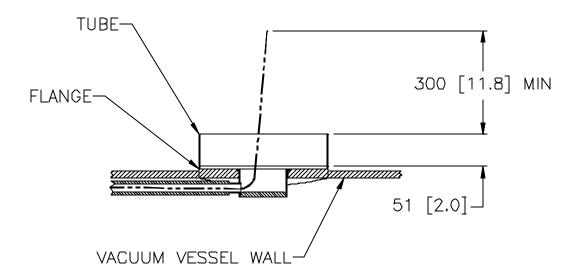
IFS flange on the vacuum vessel. Dimensions are in mm [inches]. A tube of 206 mm OD and 2 mm wall thickness extends 51 mm above the tube-flange joint.
